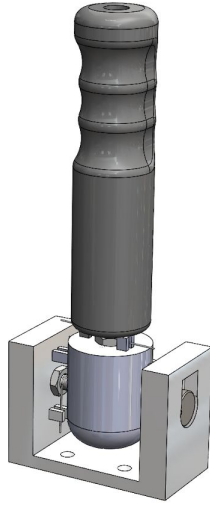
The CAD for the joystick is shown above. The structural components will be 3D Printed while the string pots and torsional springs will provide positioning and positioning knowledge.
